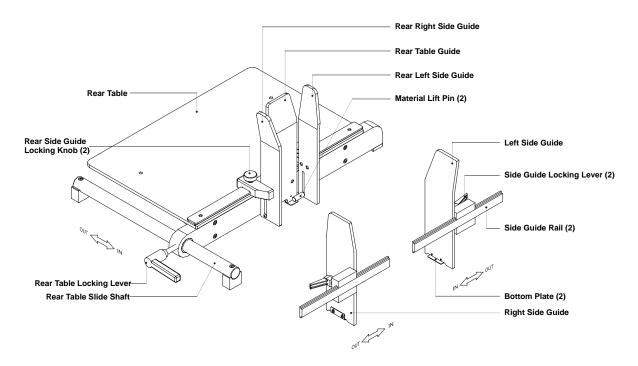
Rear table and side guide illustration indicating the various adjustment points of the feeder.
